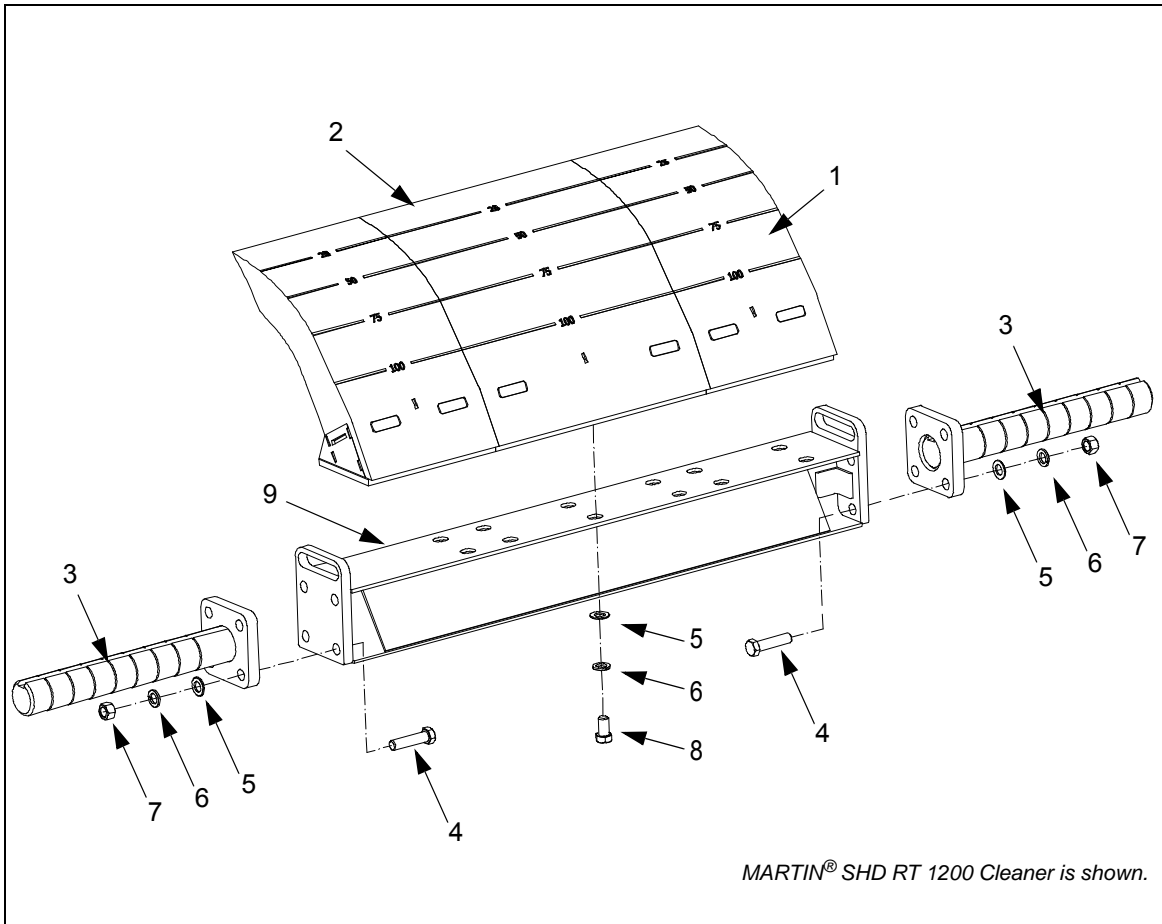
MARTIN® SHD RT Cleaner; Part no. 41200-XXXXXXXX+E
